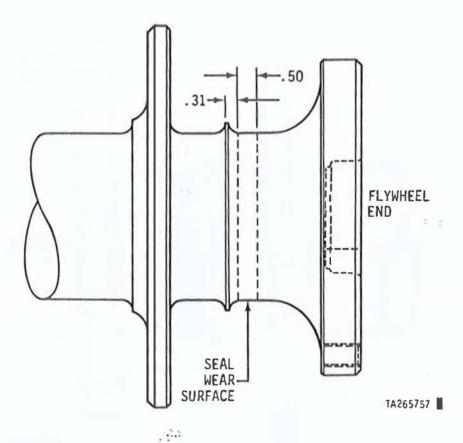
Rear oil seal wear surface on flywheel end of crankshaft.
